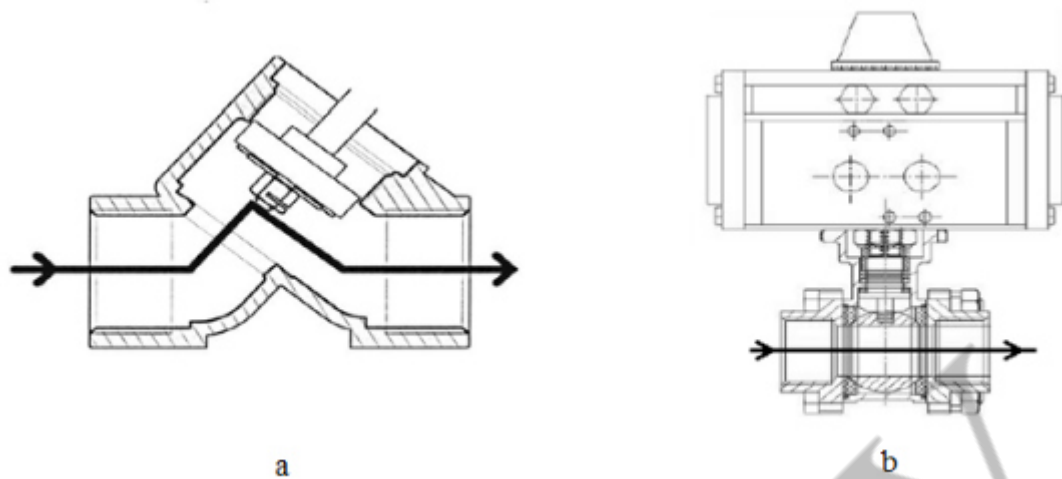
The direction of the product when passing through: a – saddle valve, b – ball valve on the right
